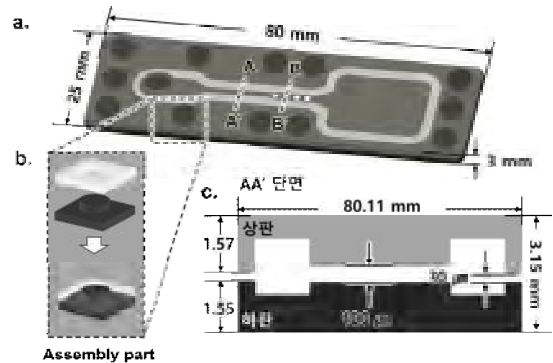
Schematic view of the mold injection microfluidic chip. a) Designed chip dimensions, b) Assembly part, c) A cross-sectional view of AA'
